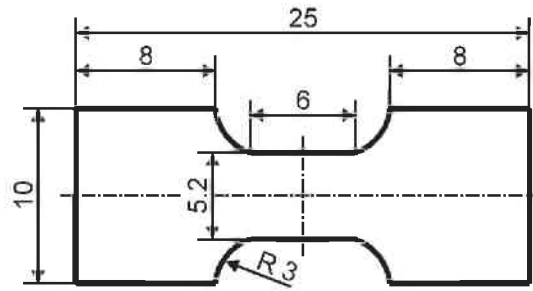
Tensile test specimen used for SS315 and Al1050 testing.
